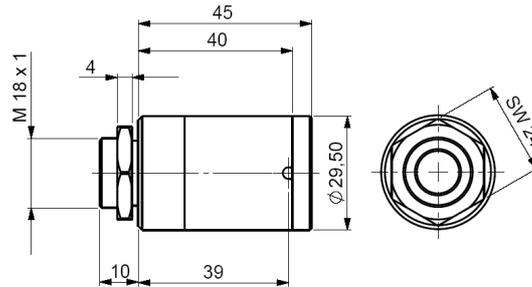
Massive housing, stainless steel [TM-MHS-CT]
